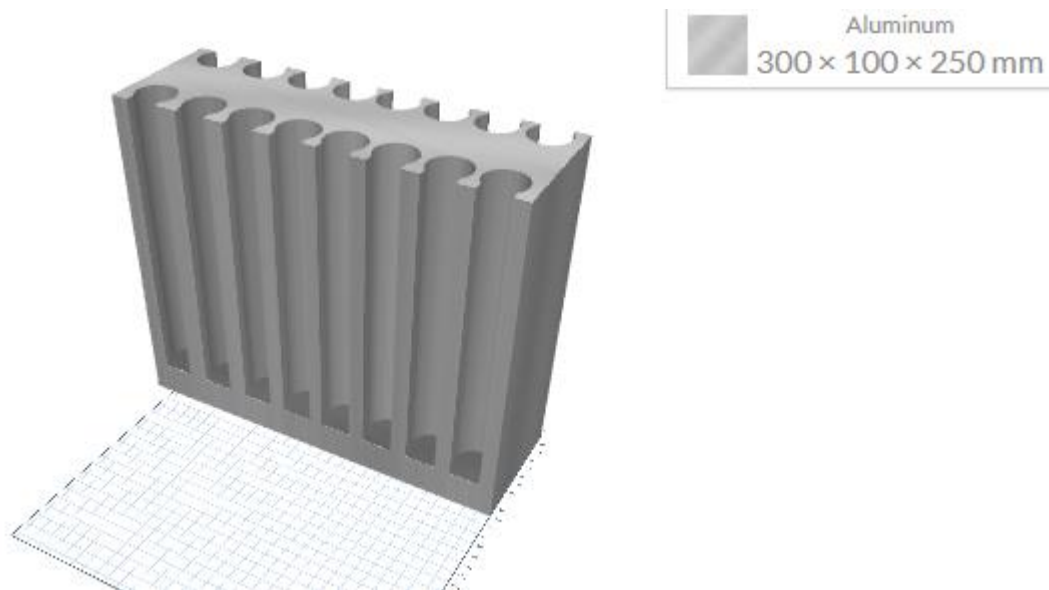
The basic block forming the suggested Mark 2 mini-chemostat array (dimensions W300xL100xD250 mm; created with Easel Free CNC by Inventables).
